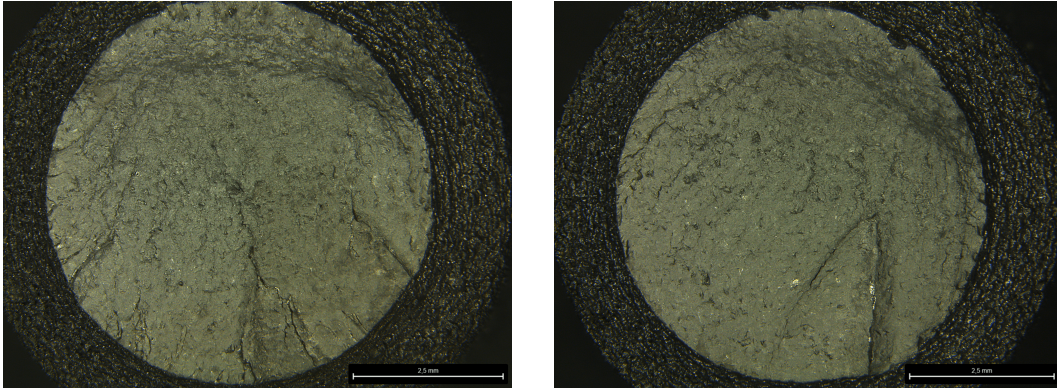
Fracture surface specimen A2.2(30):1 (left) A2.2(30):2 (right).
